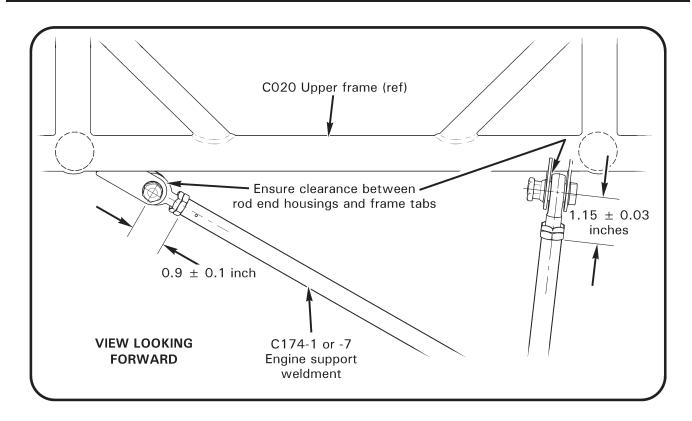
ENGINE SUPPORT WELDMENT
